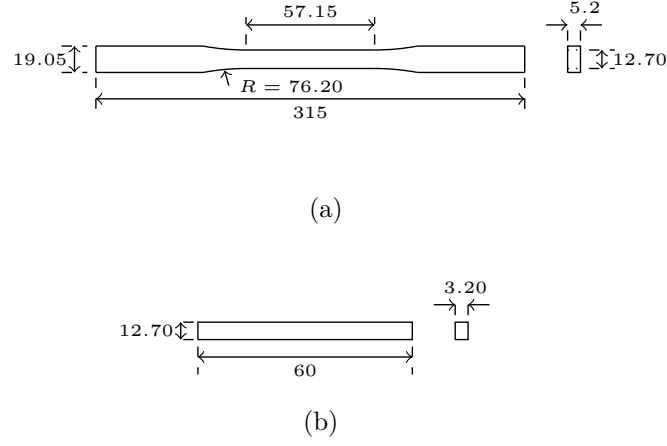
Dimensions in mm of the samples used: a) ASTM Type I specimen for tensile testing, b) ASTM D638 specimen for three-point bending testing.
